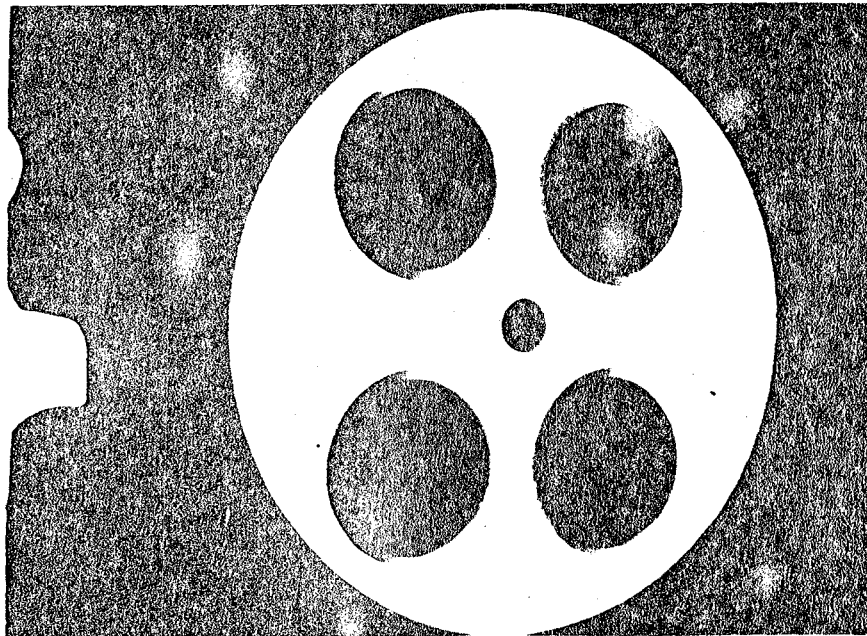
Partially stabilized zirconia head face with integral valve inserts
